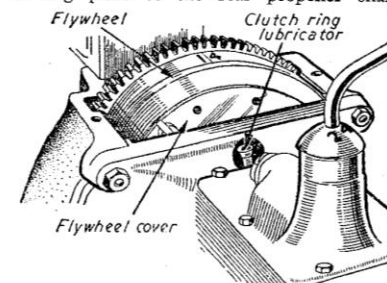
When retiming the ignition, the $1/4$ mark on the flywheel should be $1/4$ in. before T.D.C. when the contact breaker points should just be opening with the clip set for full advance.
